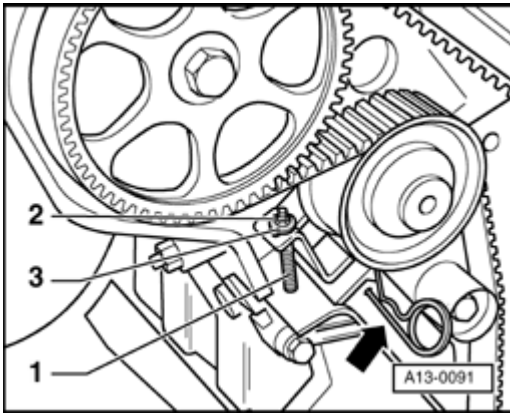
Screwing Stud Into Toothed Belt Tensioning Element & Hex Nut Onto Stud Using Large Washer
